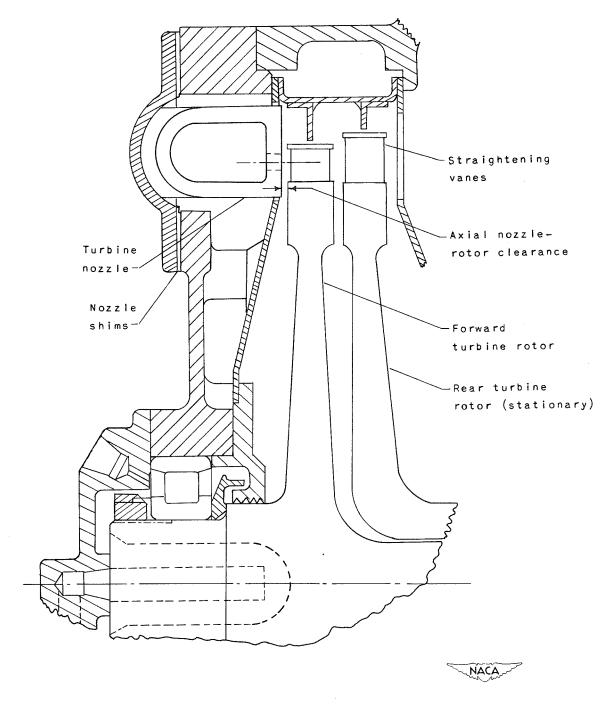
Sketch of nozzle and rotor assembly for Mark 25 torpedo power plant.
